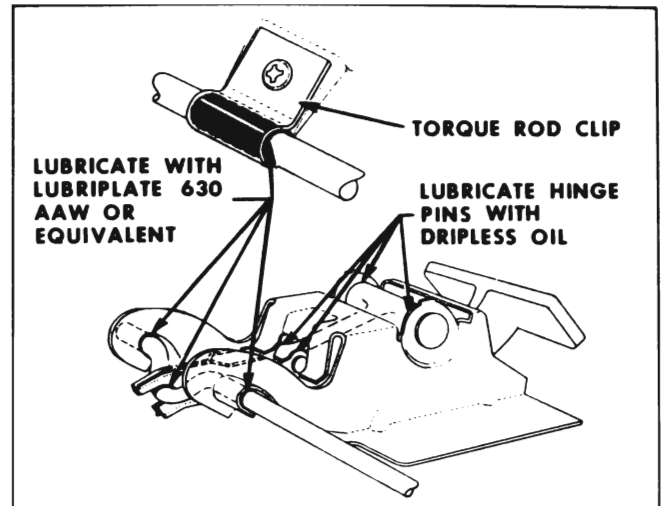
Back Door Hinge and Torque Rod Lubrication
